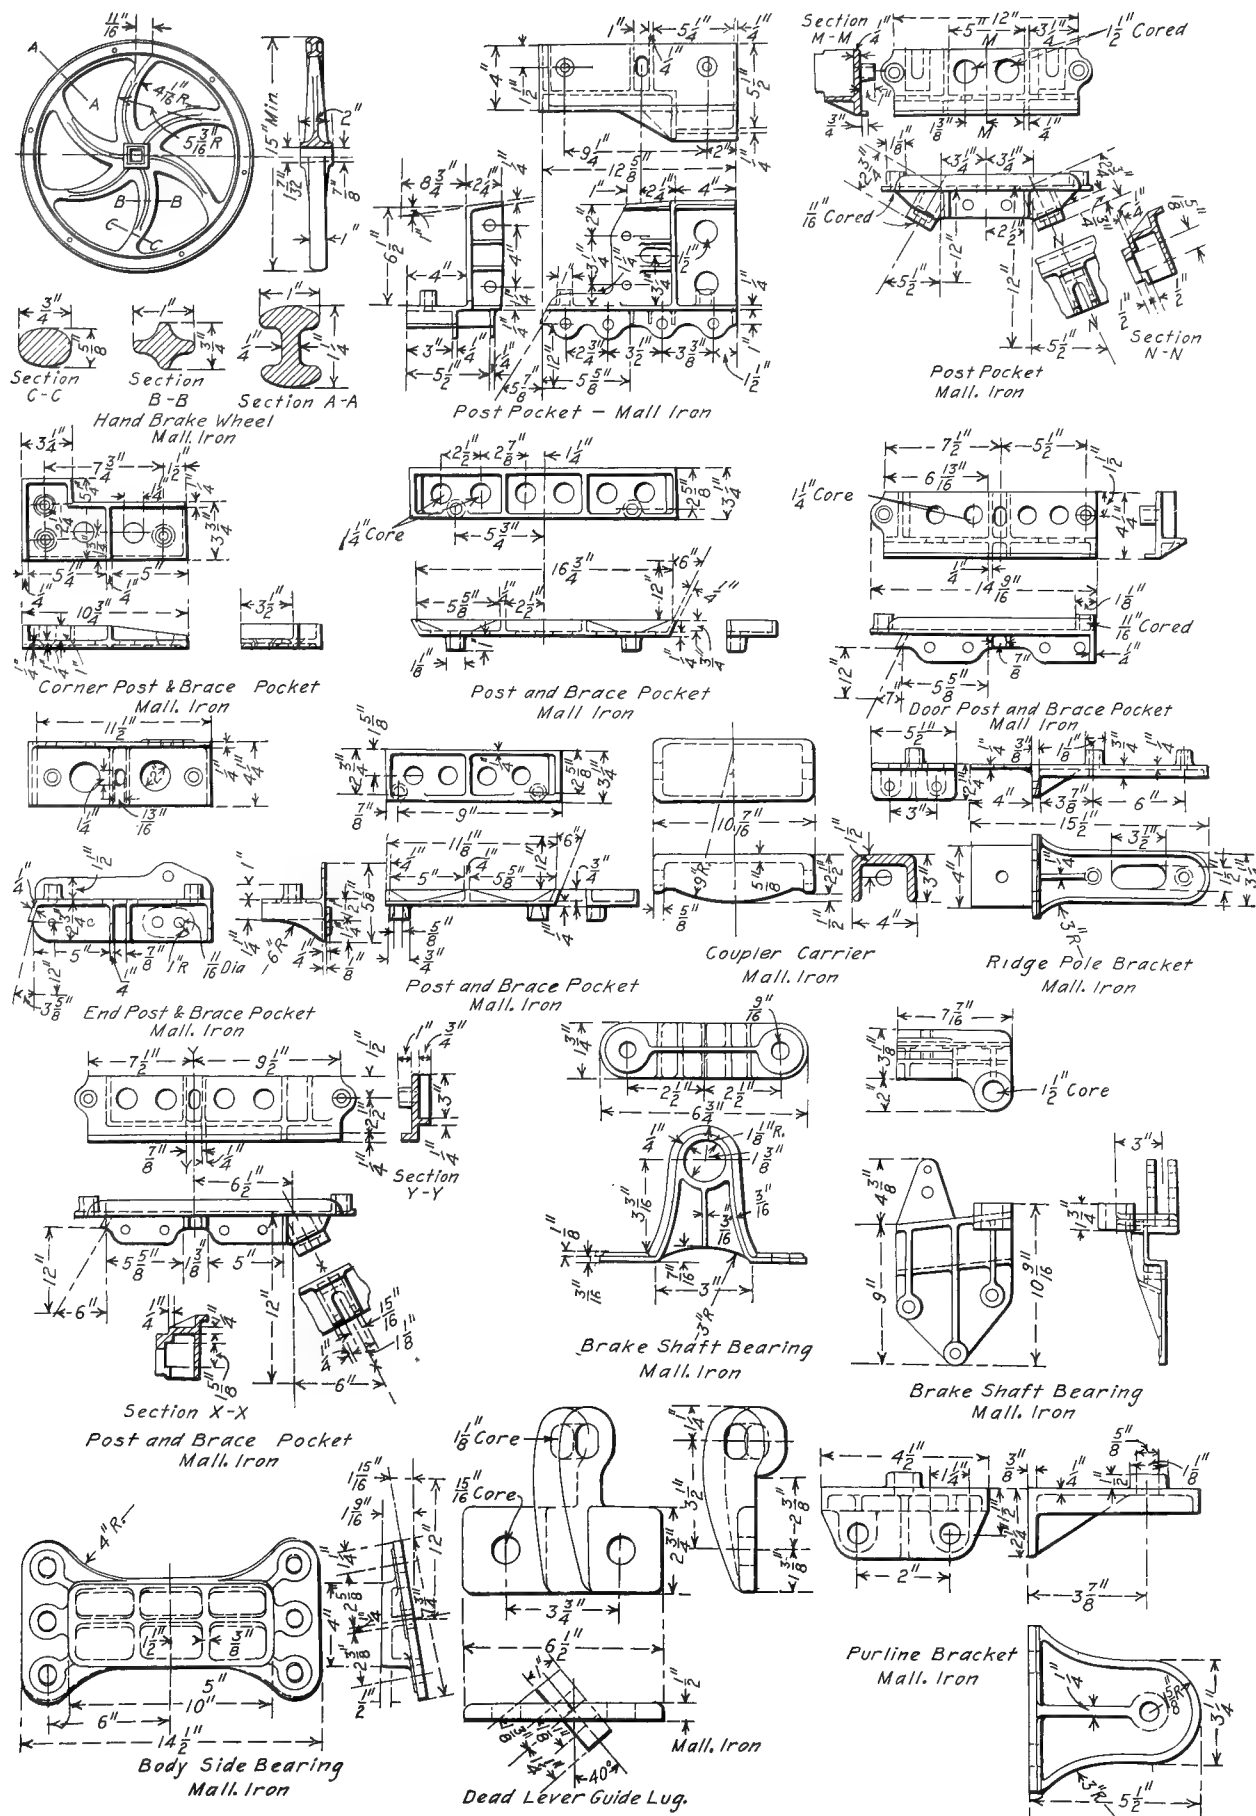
Details Used on New York Central Steel Underframe Box Car Shown in Figs. 279 and 280.
